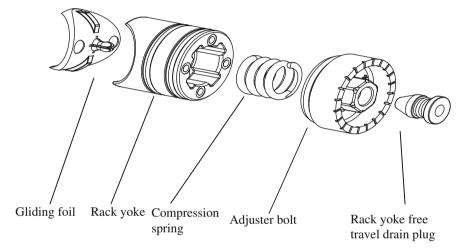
Construction of the rack yoke assembly in the gear case
